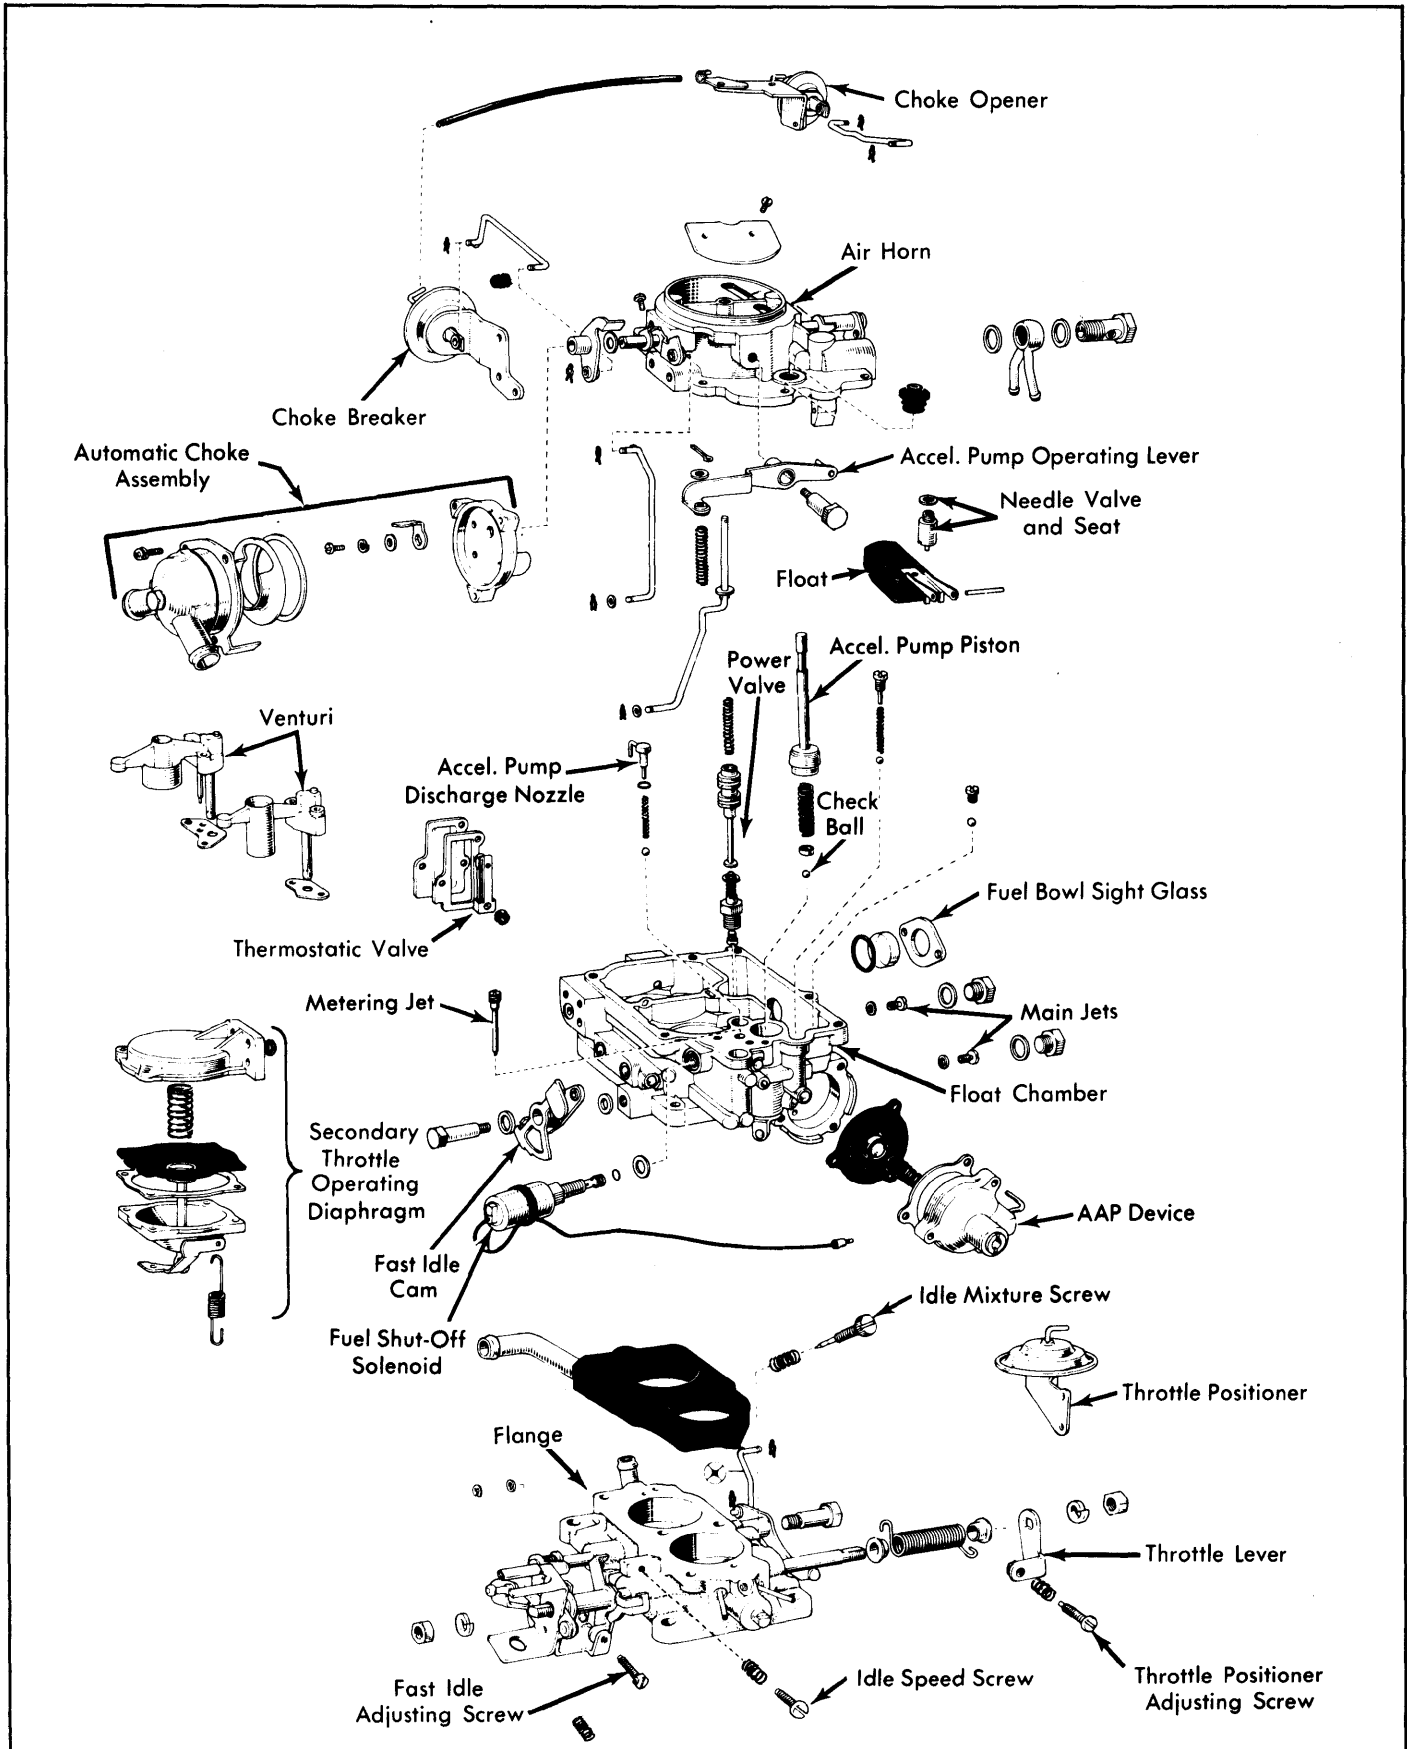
Exploded View of Aisan 2-Barrel Carburetor (Toyota 18R-C & 20R Engines)
